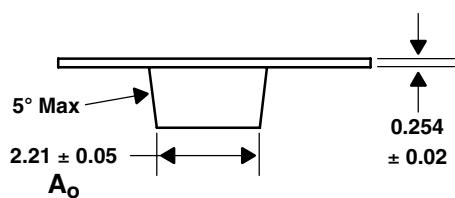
Package FN — Dual Flat No-Lead Packaging Configuration
